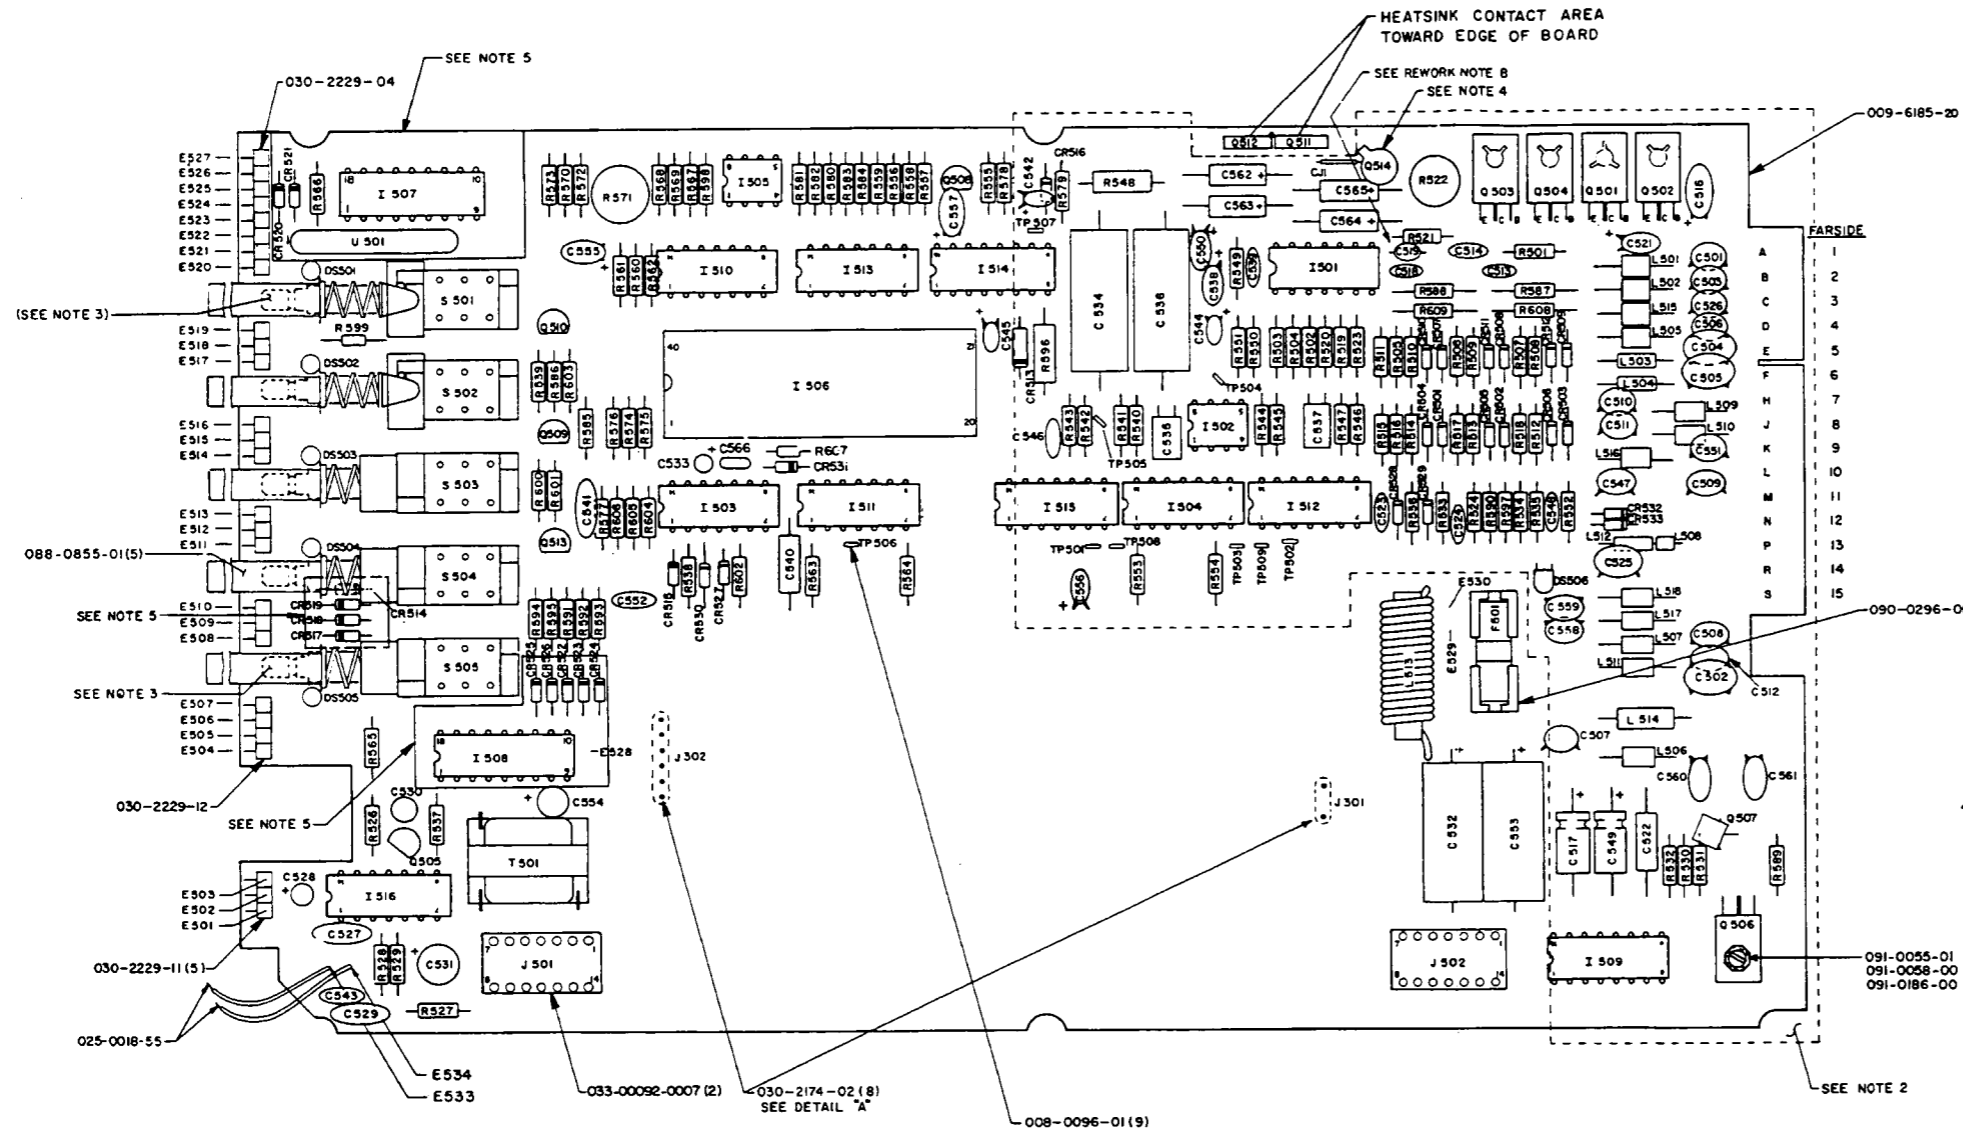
B KR 87 MAIN BOARD ASSEMBLY
